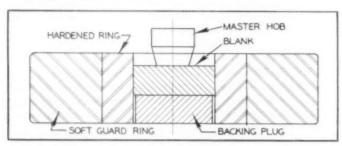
Shown here is the relieving of a blank by removal of metal from its bottom surface.
